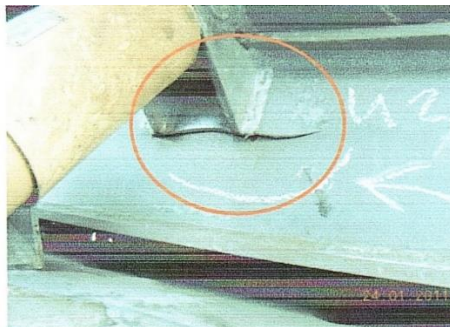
Crack in the frame of a passenger trolley when the hydraulic vibration damper is not working properly
